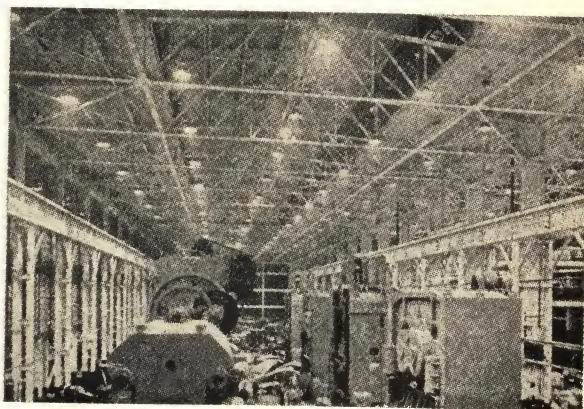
(top) Press shop, 70 x 250 feet, 35 feet to bottom of tresses has 400-watt mercury reflectors with AH1 mercury lamps mounted 35 feet above floor on 14 x 14 foot centers. Illumination averages 30 footcandles.
